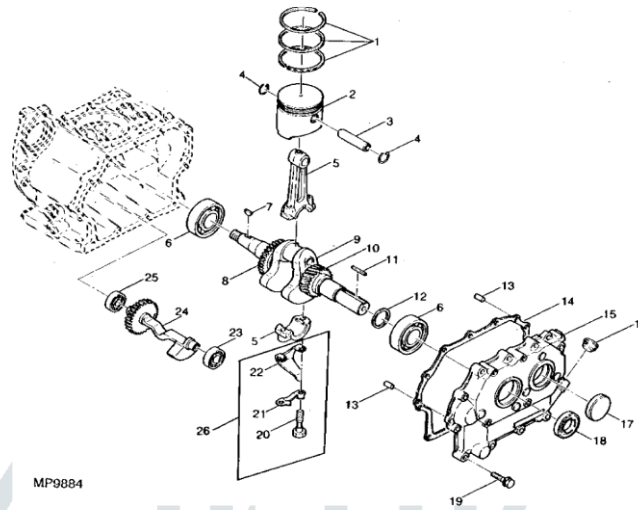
Single cylinder engine's exploded view that shows the mounting of the crankshaft in the engine (<http://www.deere.com/>, 2005).
